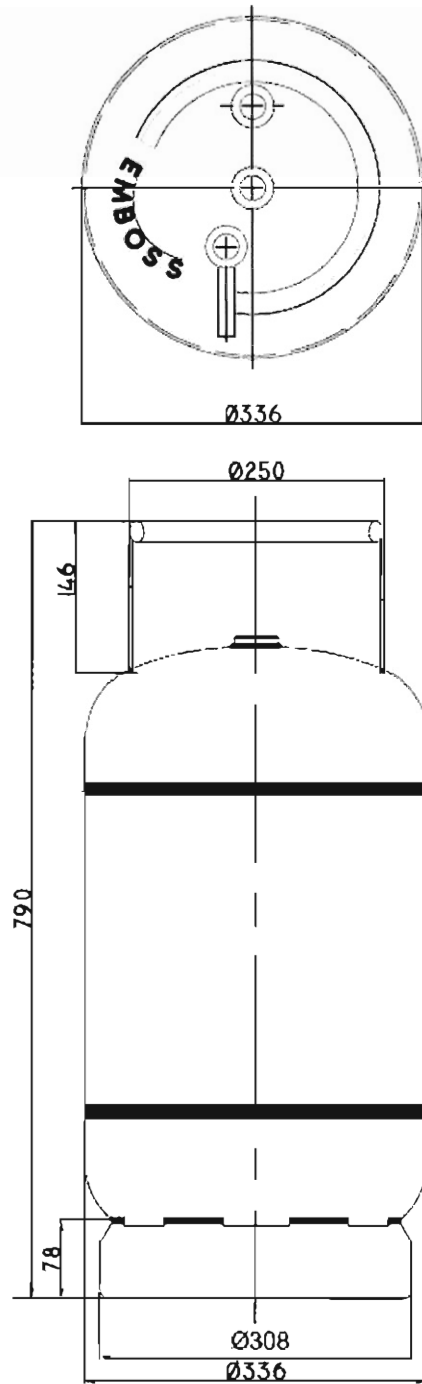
22.0 kg 336.5 mm diameter assembly details
